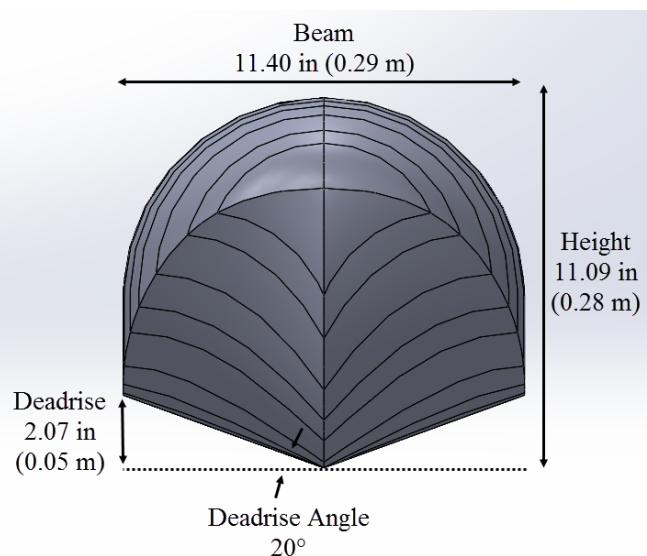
Geometric parameters shown on front view of NACA 57-A Hull CAD model
